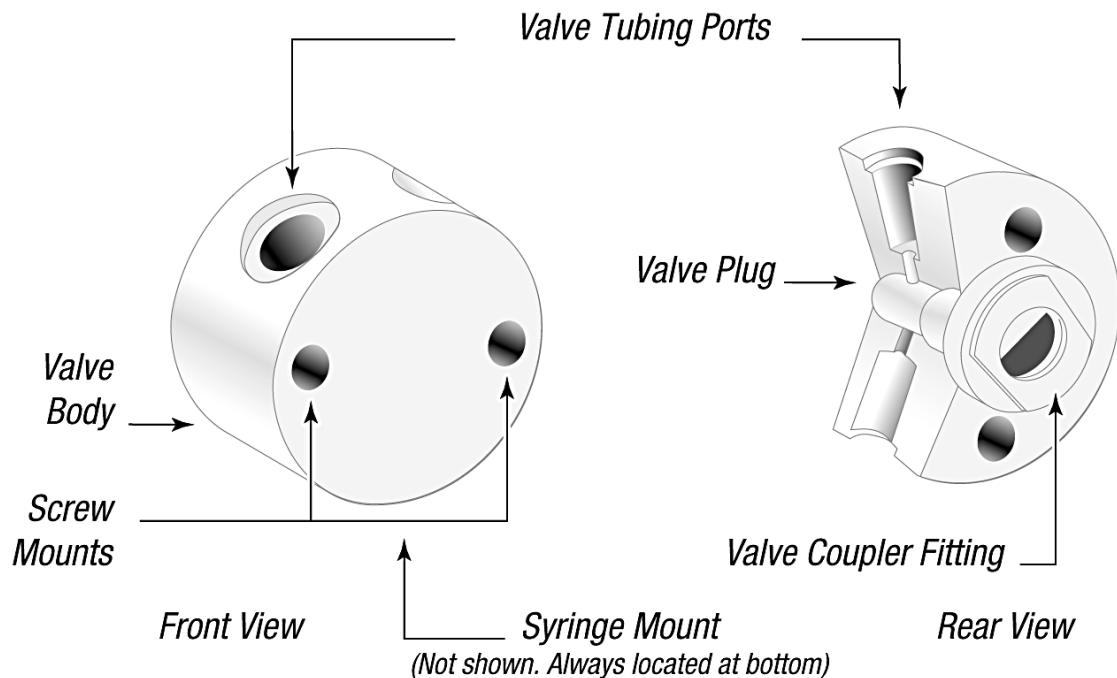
XE 1000 Valve Replacement (3-Port Valve Shown)
